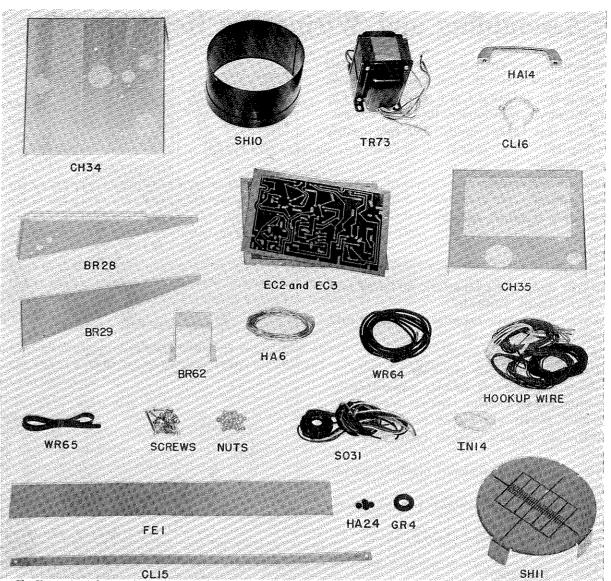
F. Parts used in various stages of the assembly are shown above and listed below. Do not remove the cathode ray tube from its box until you are told to do so.
